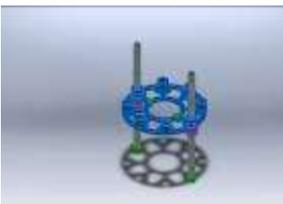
Assembly of Modified Thin Launching Ring with Rails
